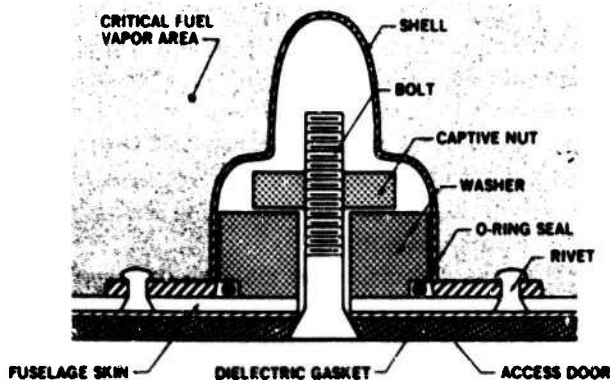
CROSS SECTION OF TYPICAL FASTENER
